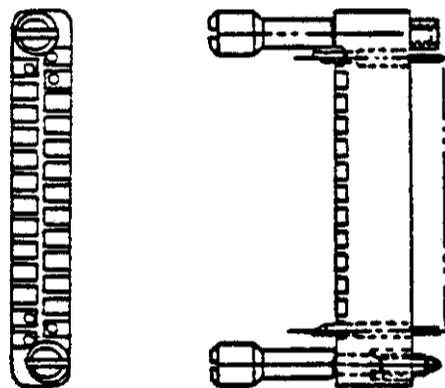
Plug with pin contacts and turning jackset shown (also available with socket contacts and alternate mounting hardware), MIL-C-55302.
